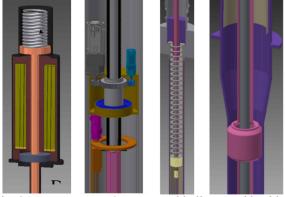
Magnet, screw & motor, seal bellows and bushing
